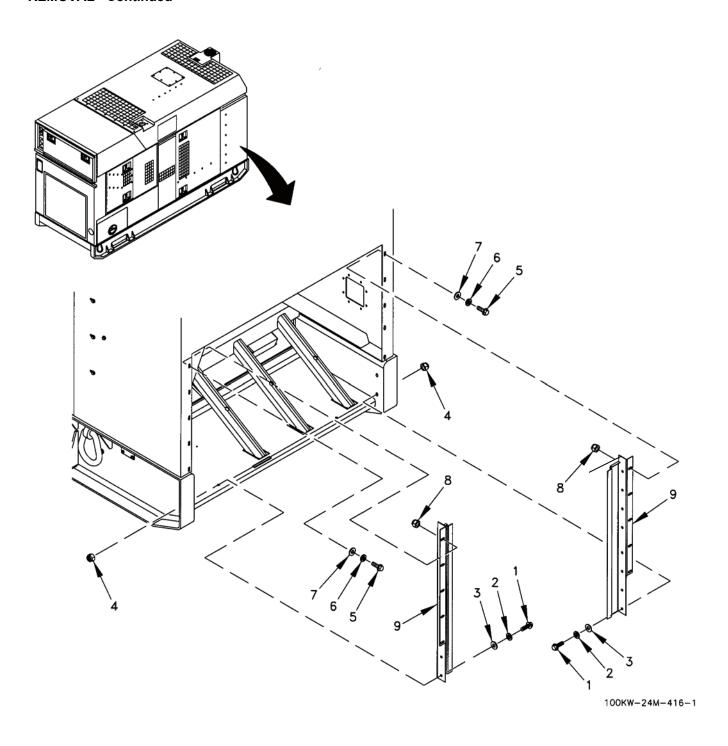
Front Section Housing Assembly (Sheet 1 of 2).
